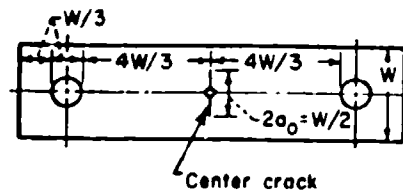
Center-Notch Tensile (CNT) Specimen.
